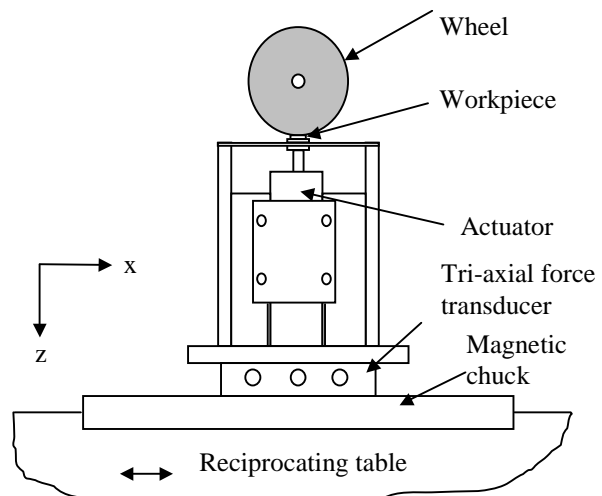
Experimental Setup for grinding with modulation to the workpiece
